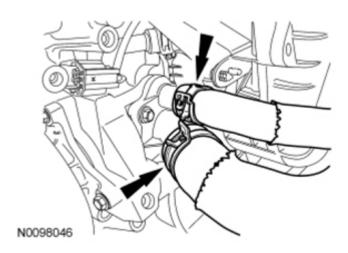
Locating Auxiliary Coolant Pump Hose And Upper Radiator Hose Courtesy of FORD MOTOR CO.
